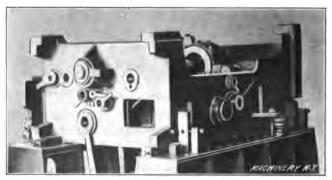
Combined Drilling and Boring Jig Used with a Horizontal Drilling and Boring Machine
